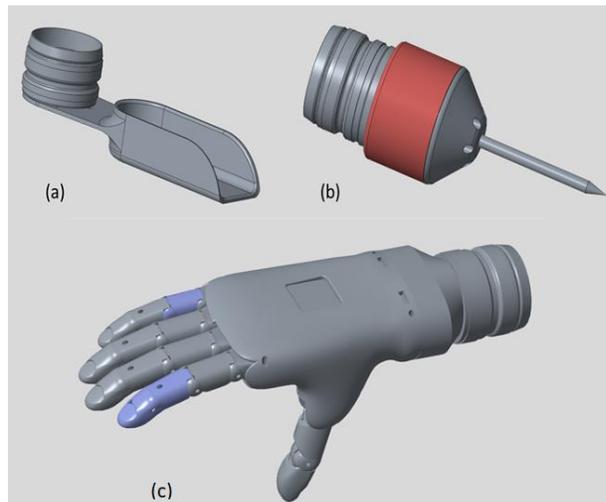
Specific Purpose Tools. (a) Scoop. (b) Segregation Tool. (c) KIT Hand Tool
